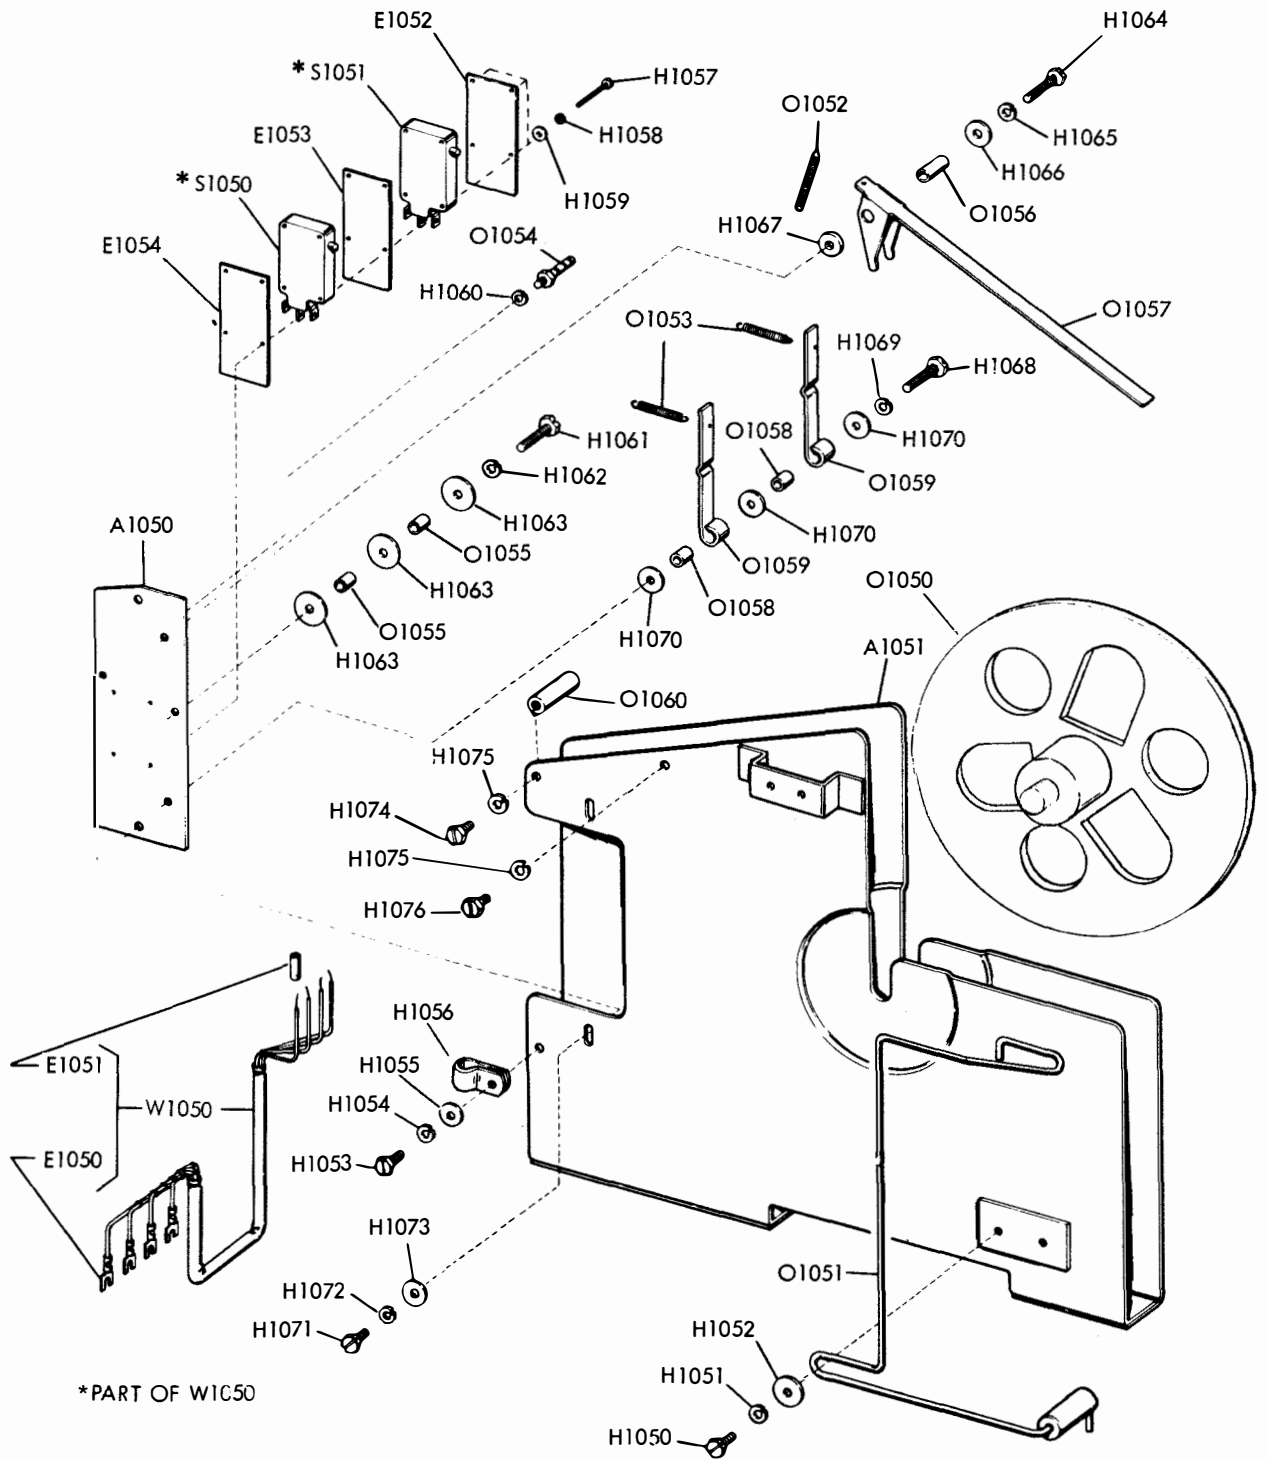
Tape Container Assembly (TT-192/UG, TT-253A/UG and TT-292/UG)
